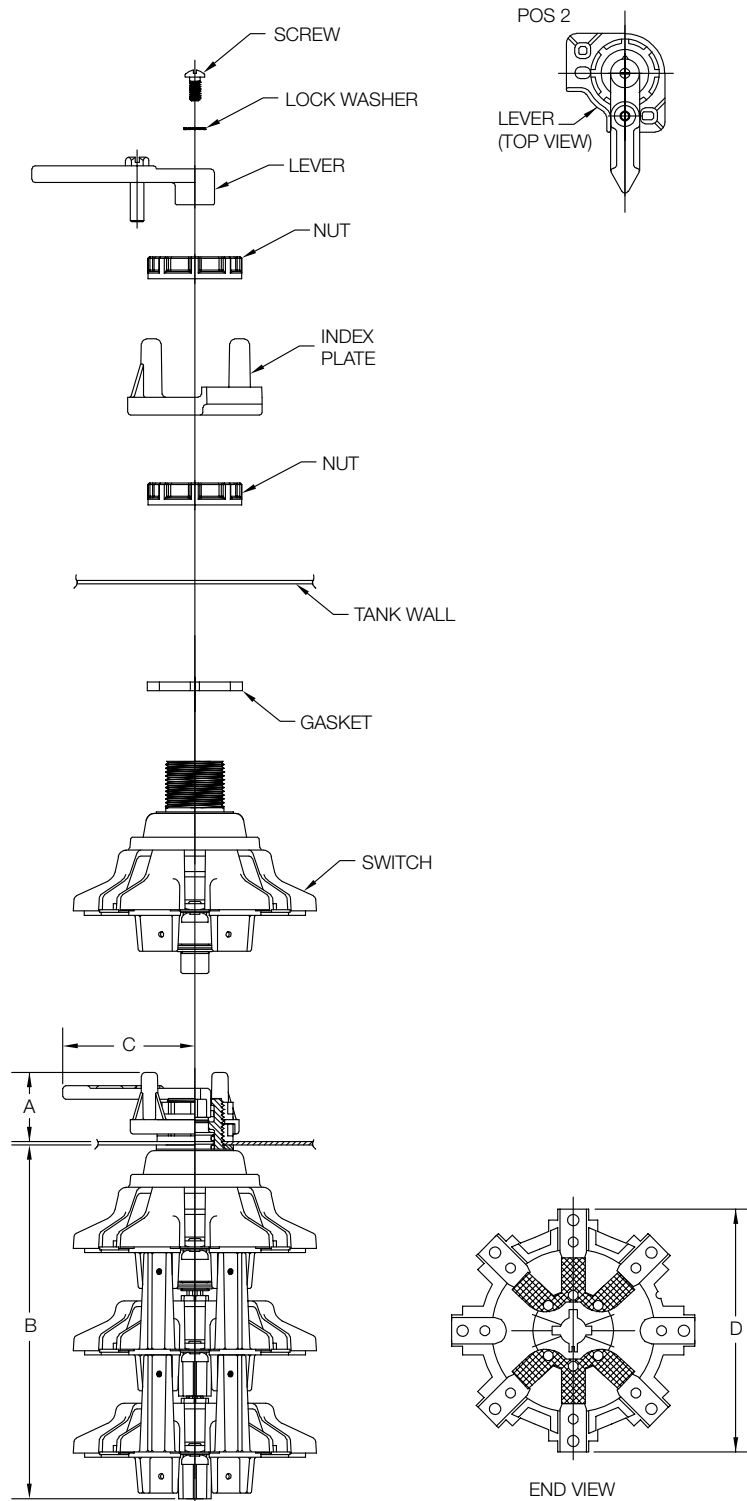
Three-phase with lever handle assembly. (Exploded view)
